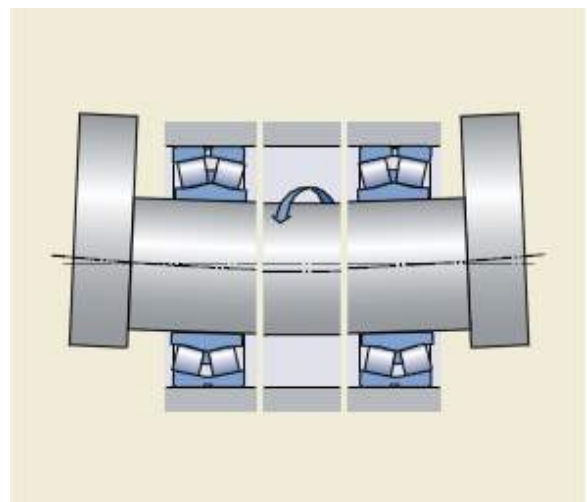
Two spherical roller bearings supporting an eccentric mass on the shaft ends.
